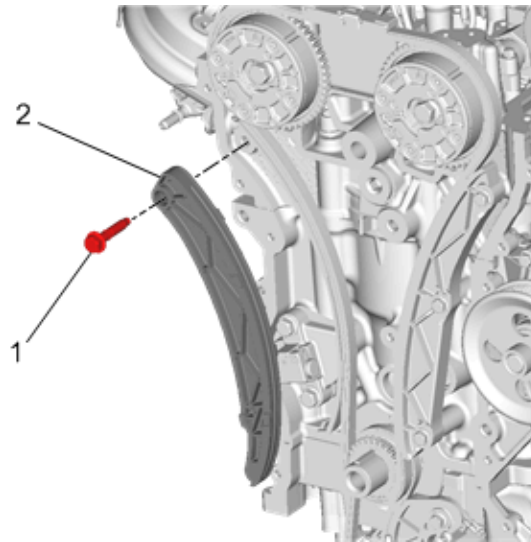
Timing Chain Tensioner Shoe And Bolt
